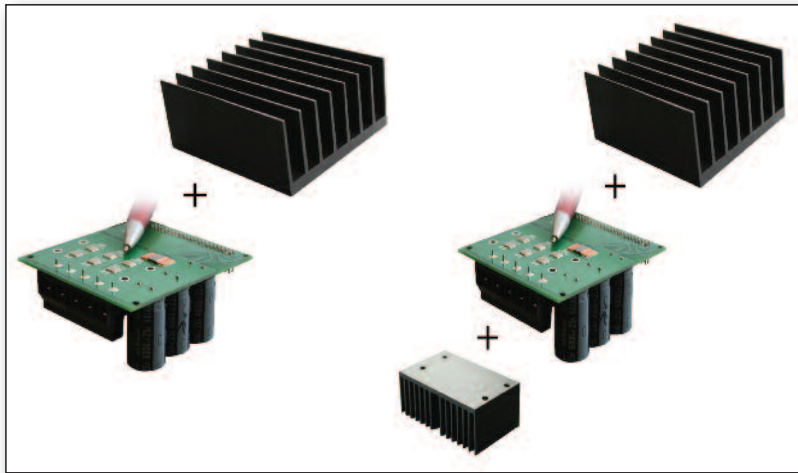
Bottom side of DirectFET inverter board and the heatsink (left) and additional heatsink for dual sided cooling (right)
